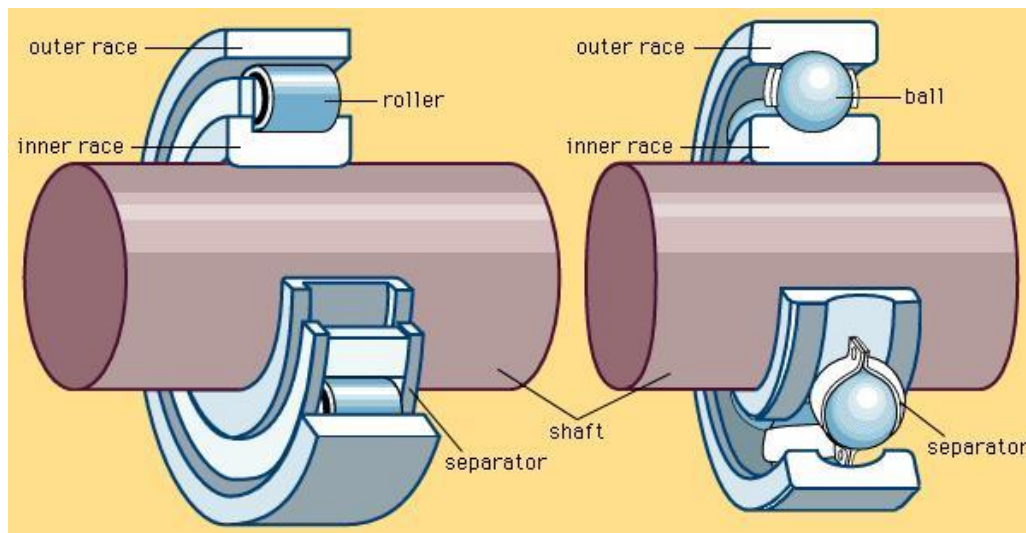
Rolling bearing (left) and ball bearing (right) [21]
